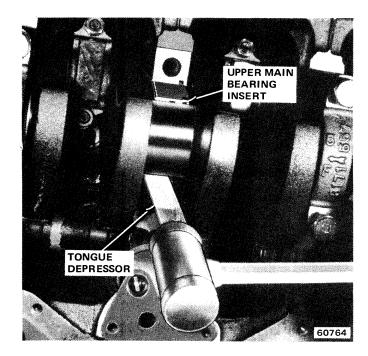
A-53 Removing Number 4 Main Bearing Insert
